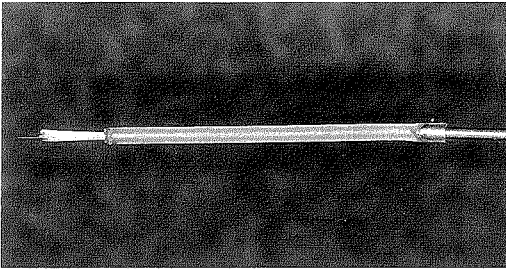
a Fabrication of FRP wire with round cross-section using a polyethylene tube
